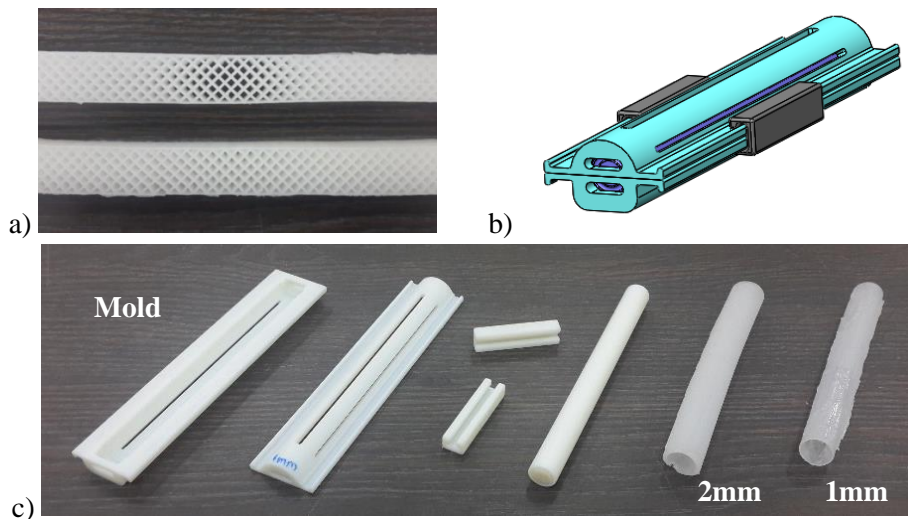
a) Flexible surfaces with a mesh structure. b) 3D design of the mold. c) The mold and the casted silicone tubes
